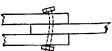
Bolt failure at antenna-mast joint.
